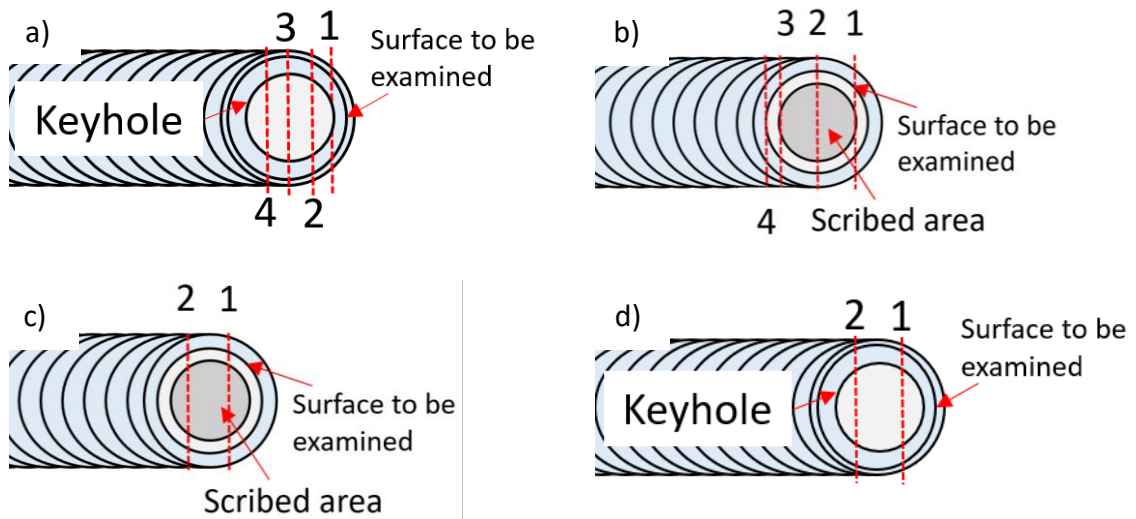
21 Keyhole sectioning schematics of welds produced with (a) left-hand threaded pin; (b) scriber pin; (c) tilted scriber pin; (d) pin without the last thread at the bottom.
